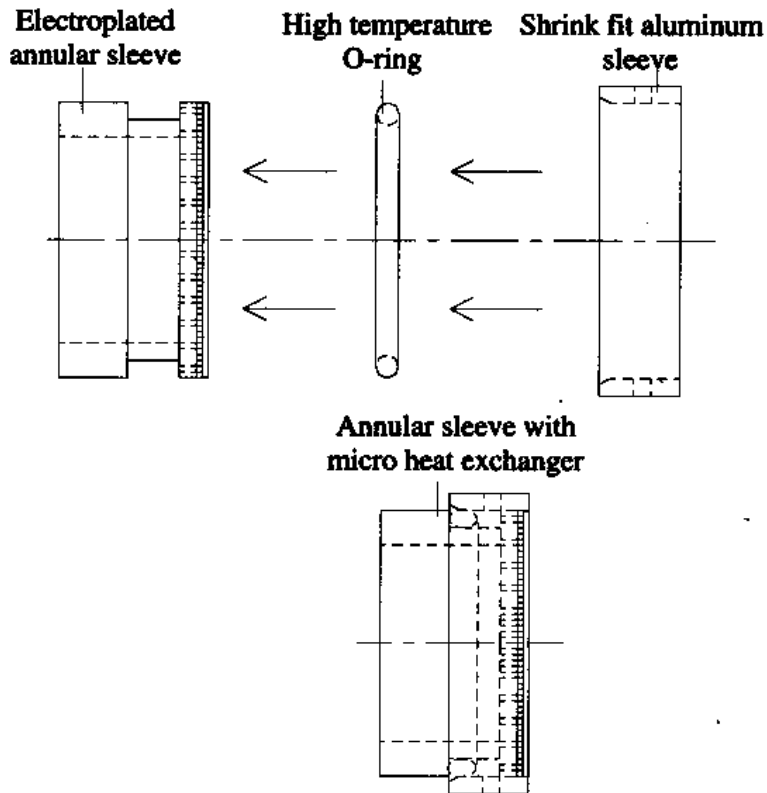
Seal prototype assembly drawing [Kountouris, 1999]
